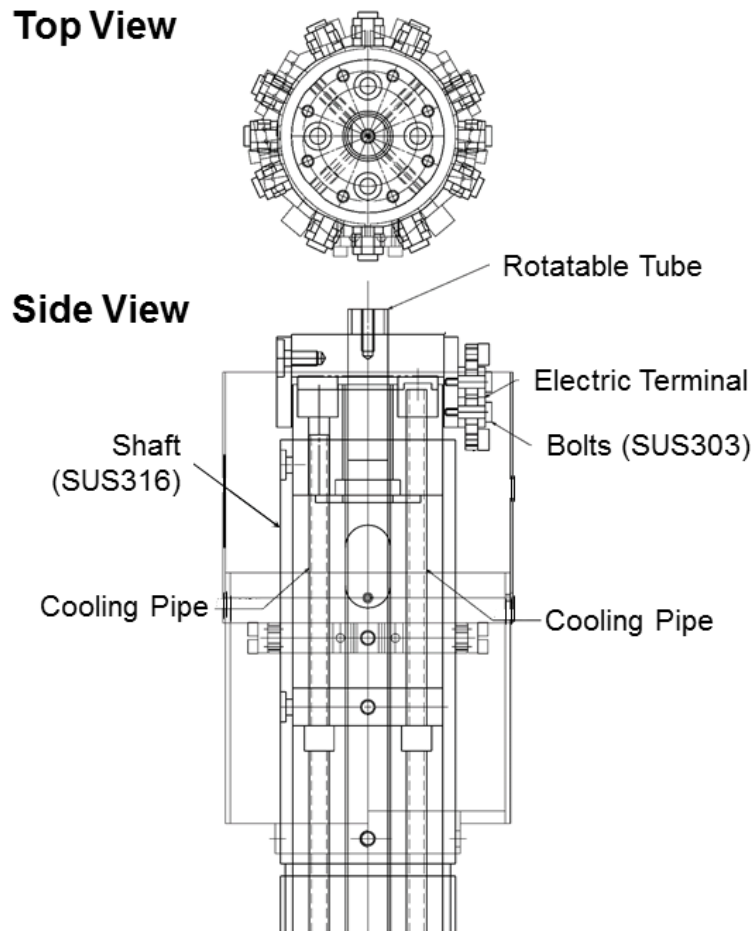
Top view and side view of the configuration of the top of the movable rod installed in 10.5-L port.
